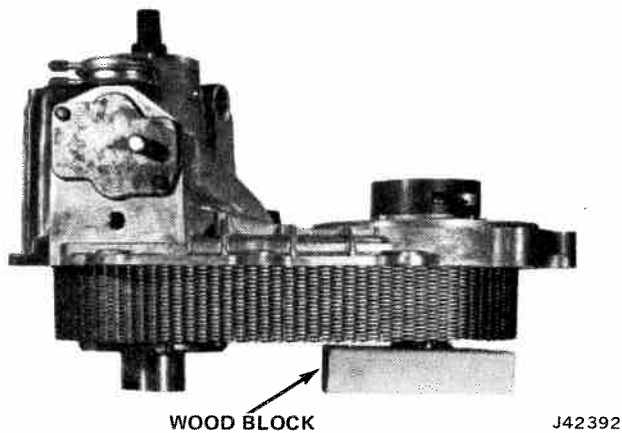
Transfer Case Cover Positioned for Disassembly
